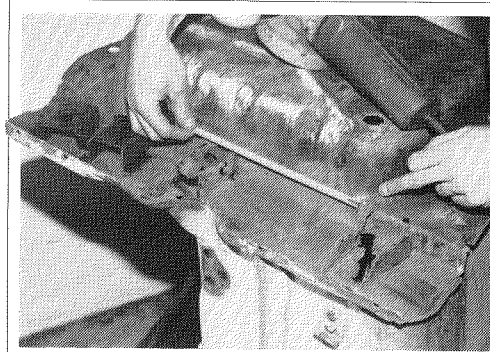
Having given everything a good wire brushing, measure and mark up before cutting anything off.
